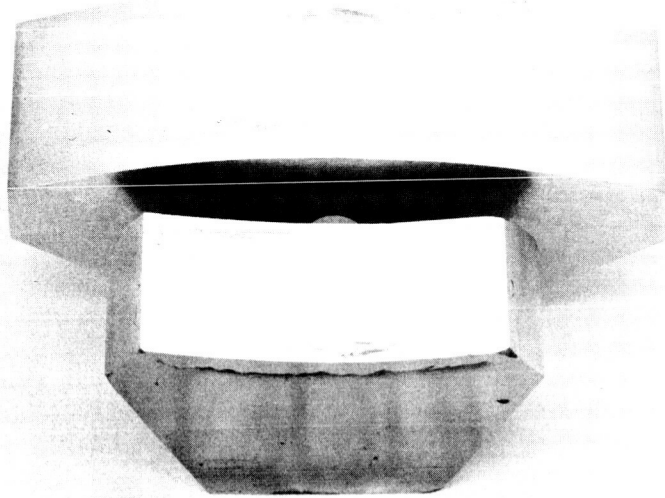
BALL JOINT TEST SPECIMEN TYPE - 7;
